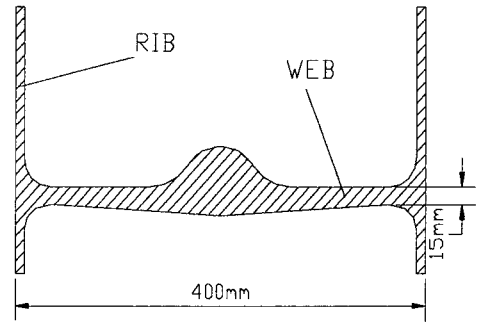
Wheel geometry used in the main analysis of 6061 aluminum alloy wheel forging processes
